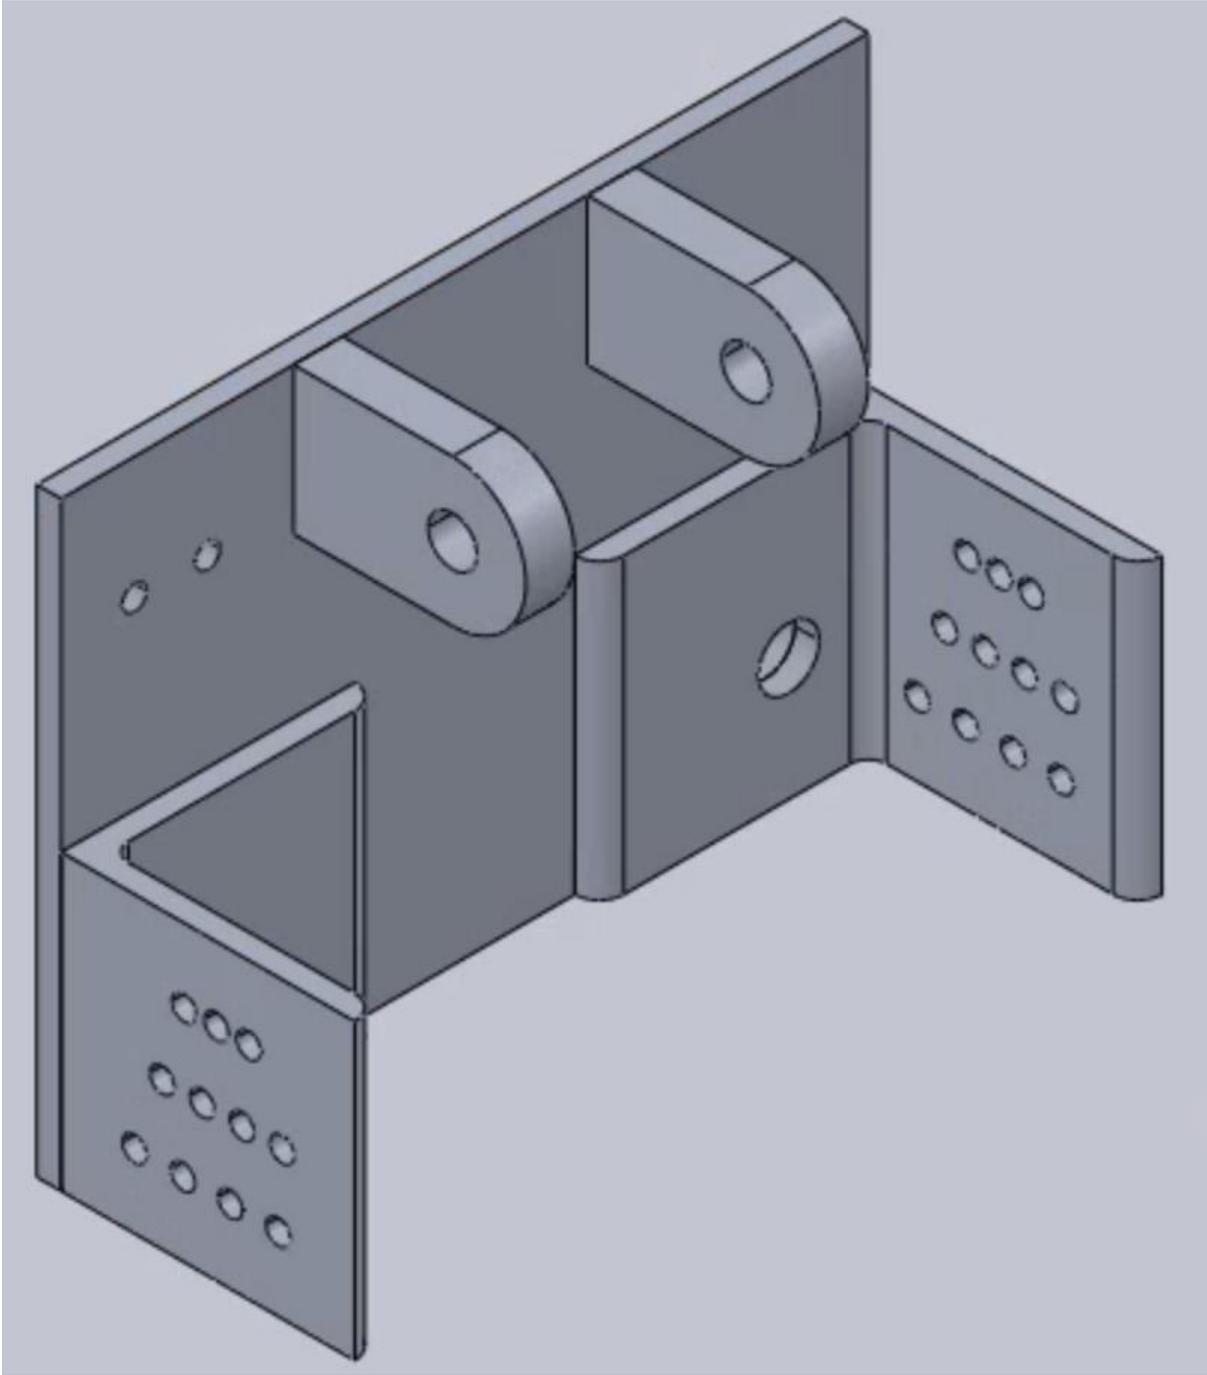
Half of the Trim Angle Adjuster. The side the bearing bolts onto.
